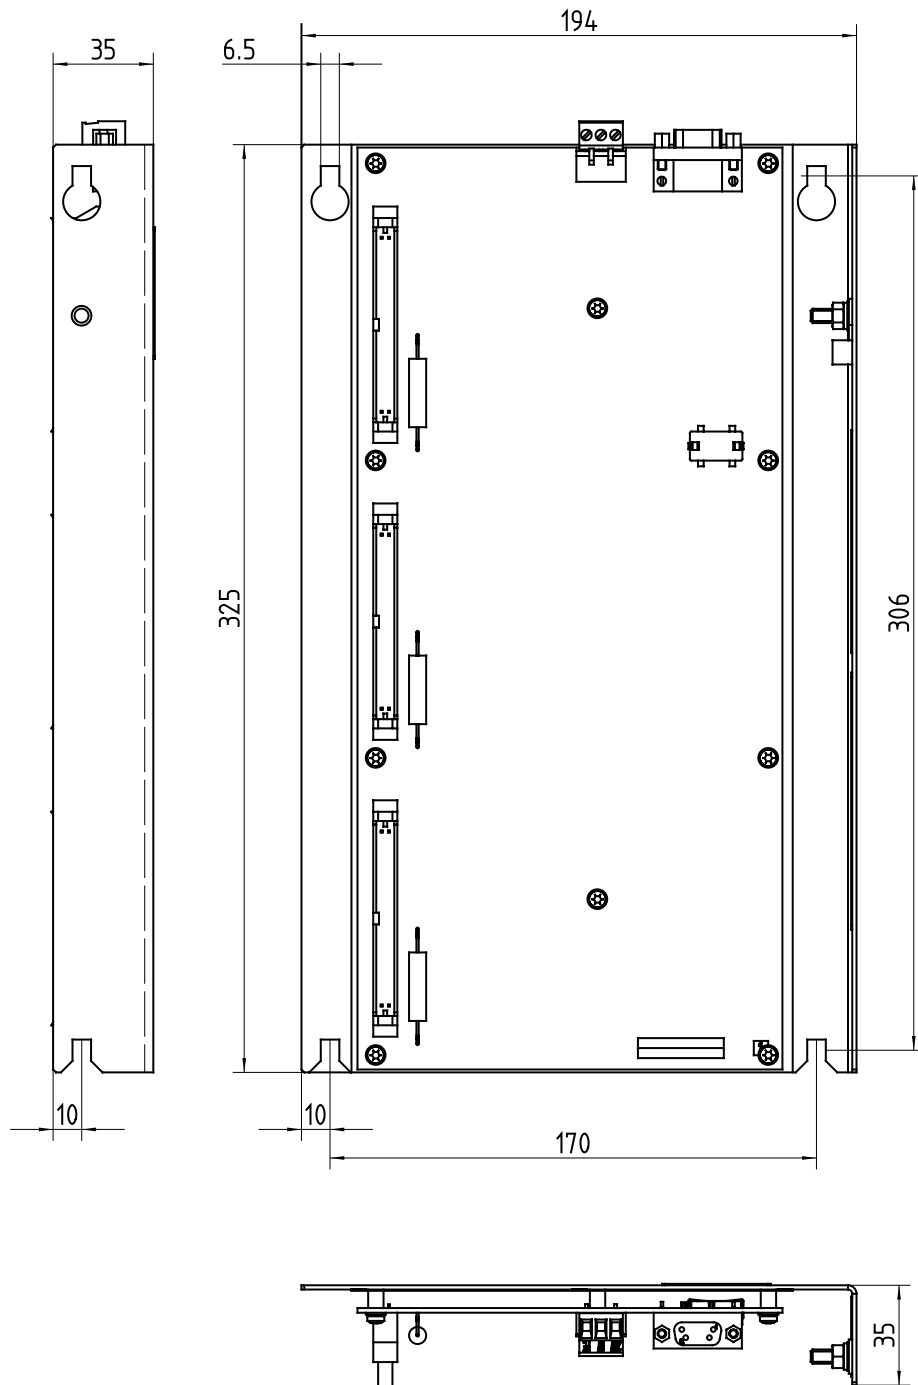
PP72/-48 peripheral module dimensional drawing
